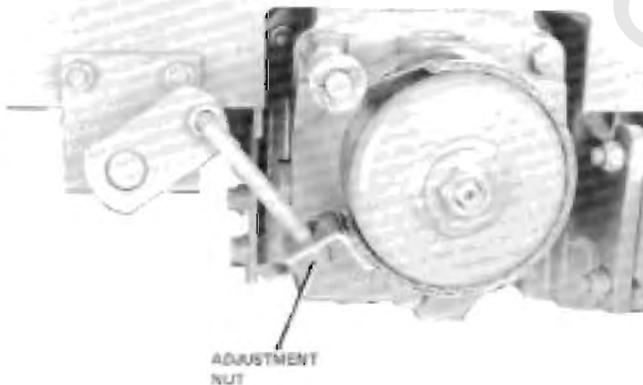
D-Series, Brake Band Adjustment (rear)
